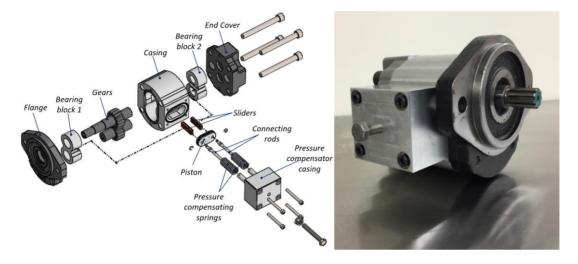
Exploded view and picture of the VD-EGM prototype realized in 2015
